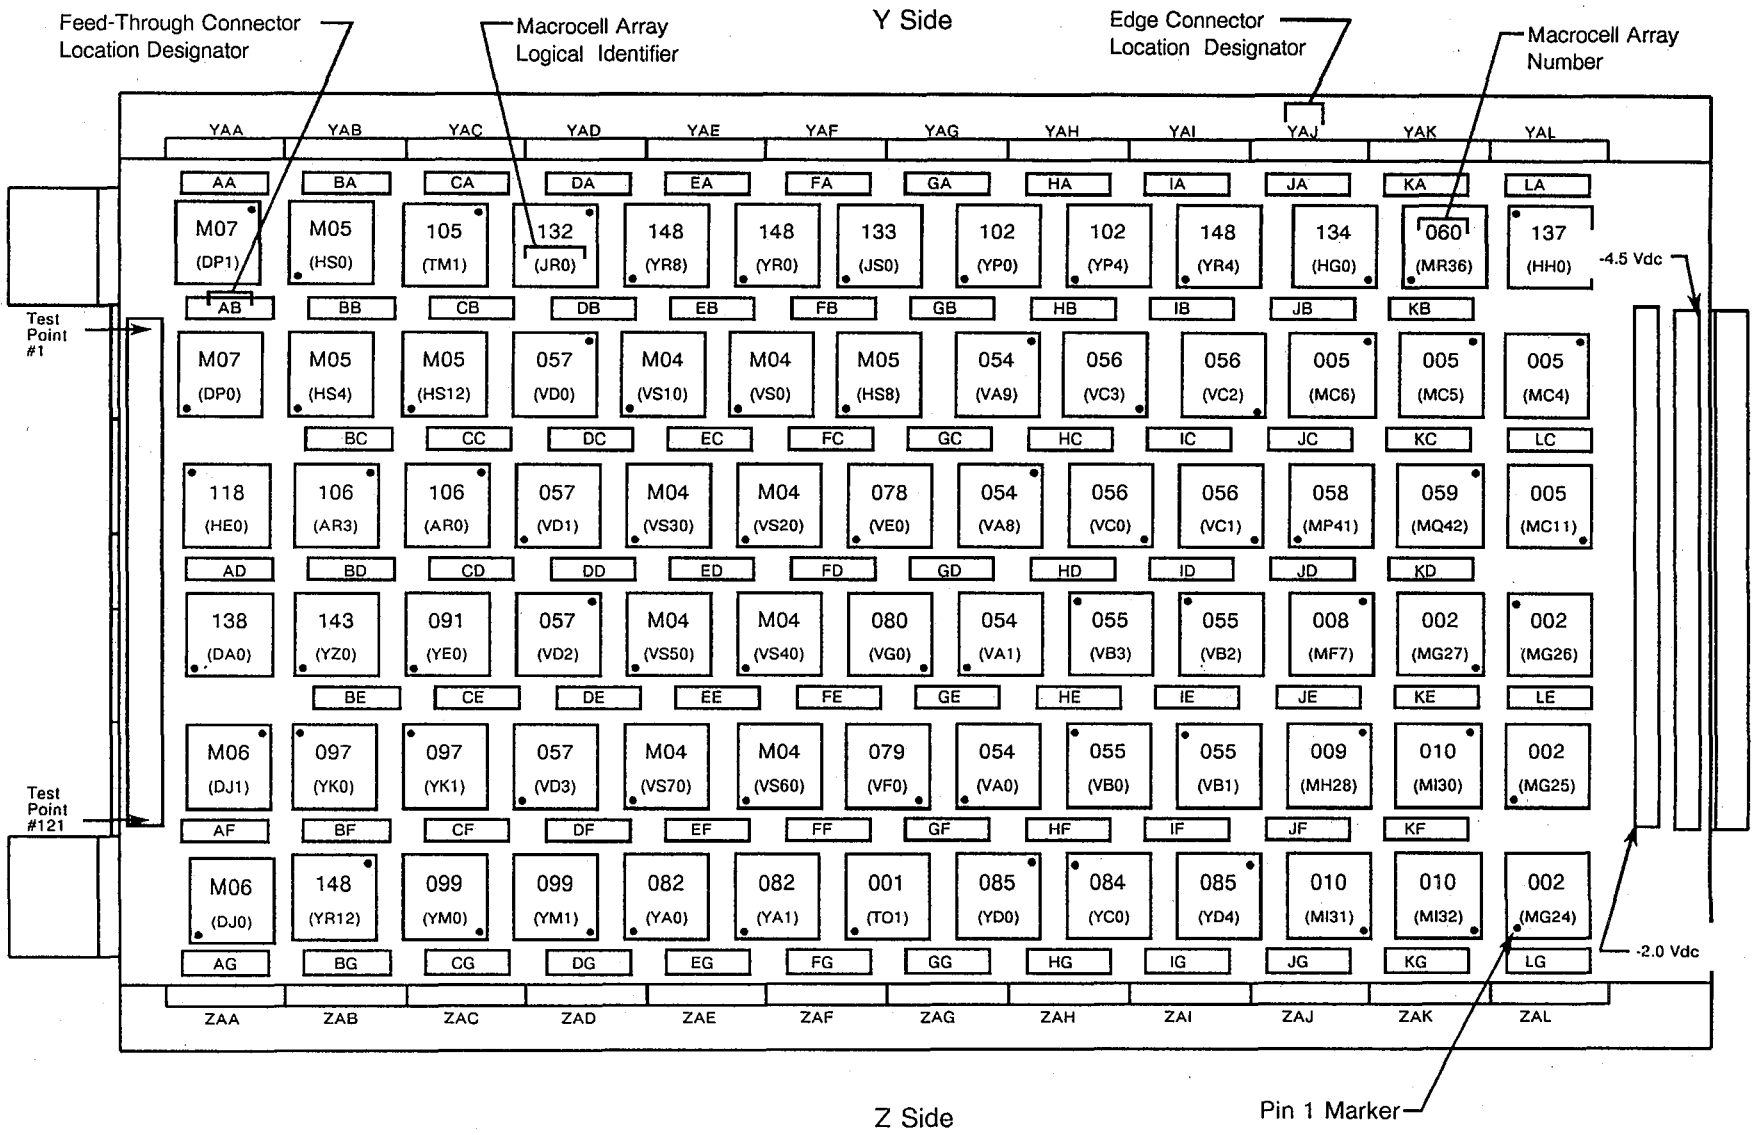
Sample of CPU Module Board A Layout Rev 4
